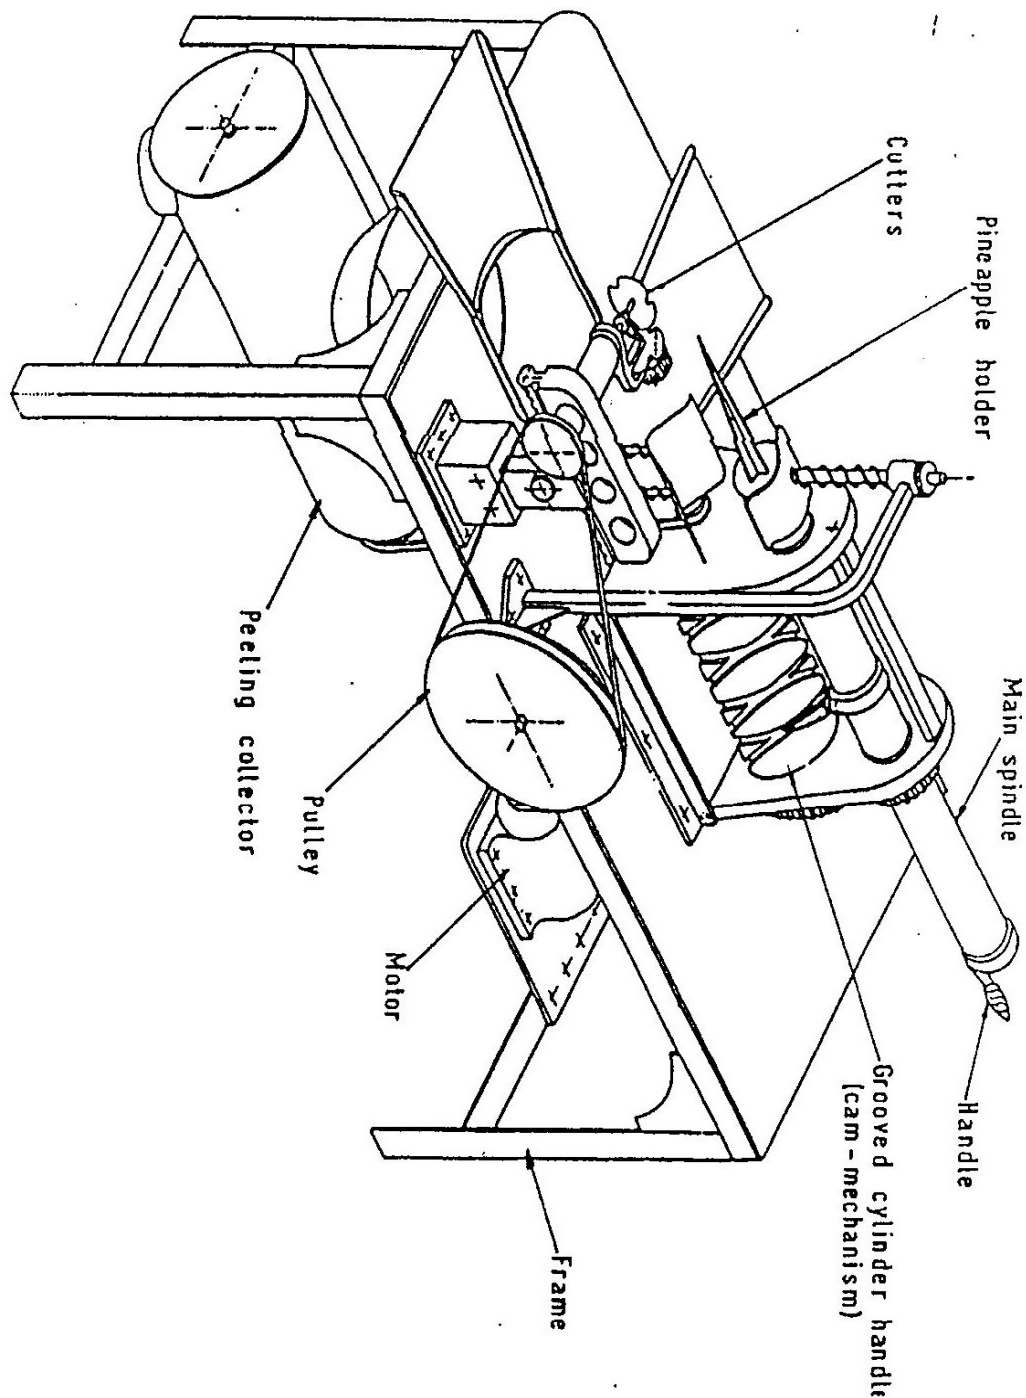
An isometric view of the pineapple peeling machine, showing major components of the machine.
